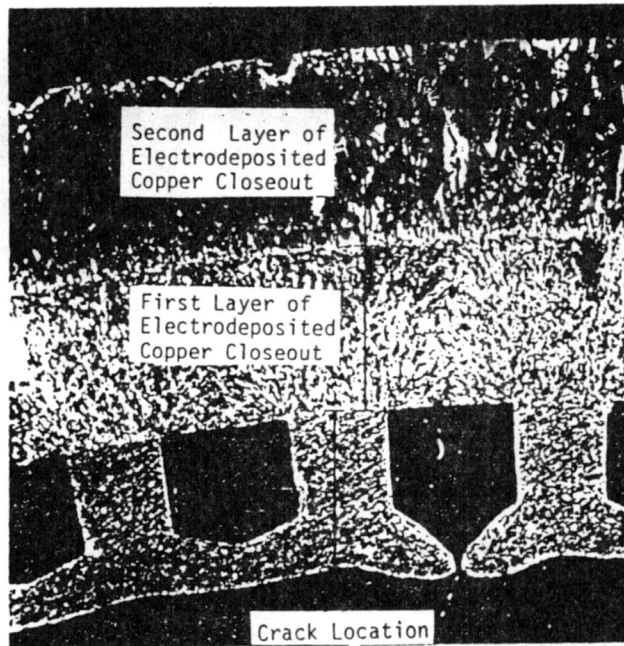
TYPICAL COOLING CHANNEL WALL FAILURE
